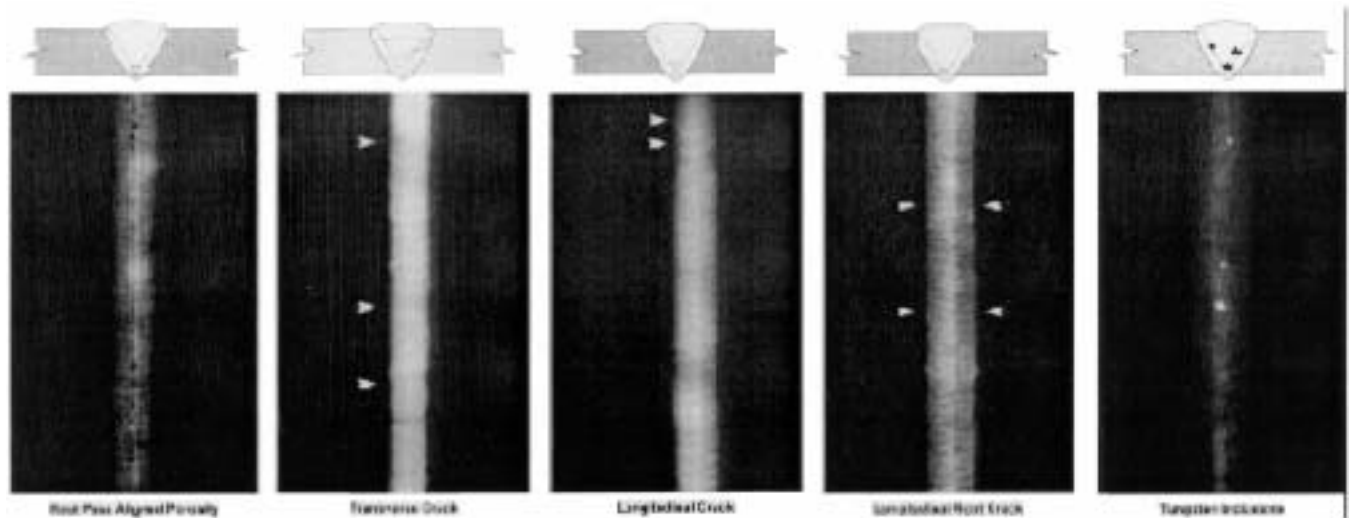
Radiographic Examples of Welds (Sheet 2 of 2)
